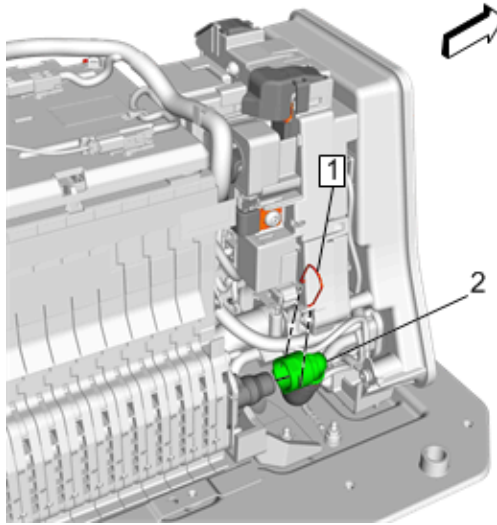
High Voltage Battery Cooling Manifold Inlet Hose And Retainer
